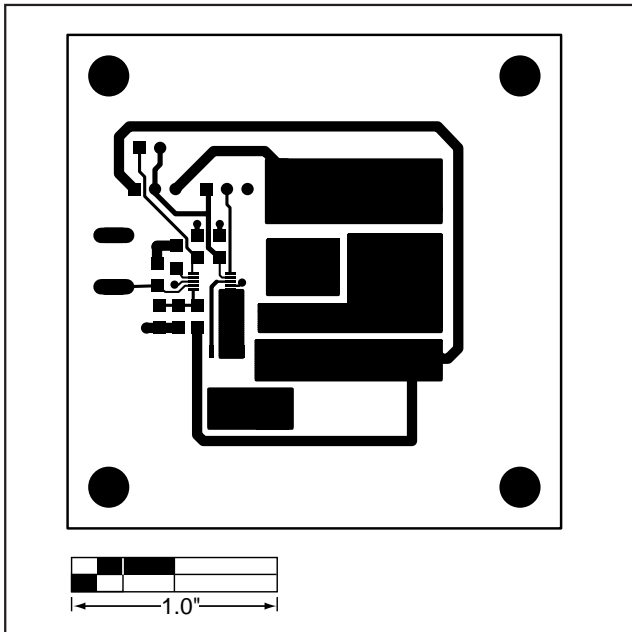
MAX668 EV Kit PC Board Layout—Component Side
